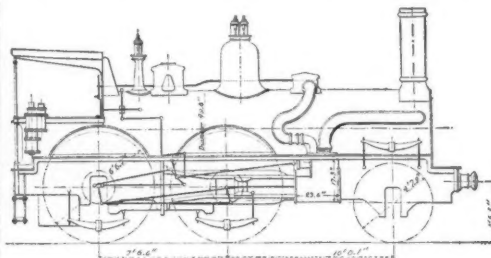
Express Engine—Chemin de Fer du Midi.
